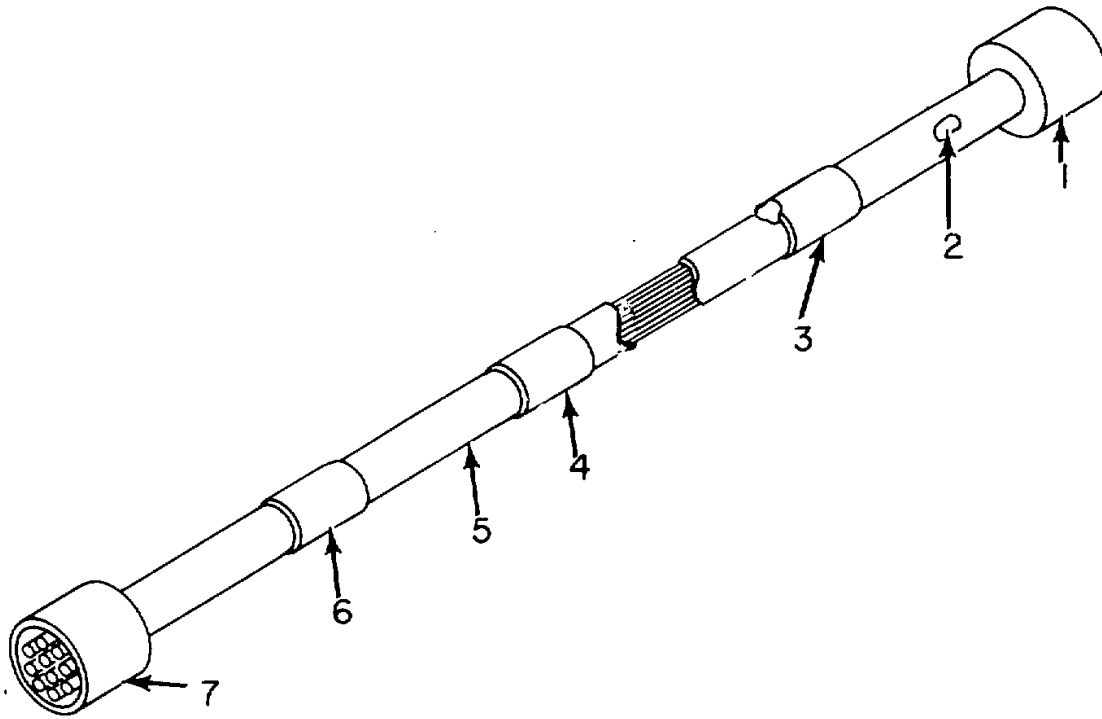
Cable Assembly, Special Purpose, Electrical CX-12501/U (W-7).
